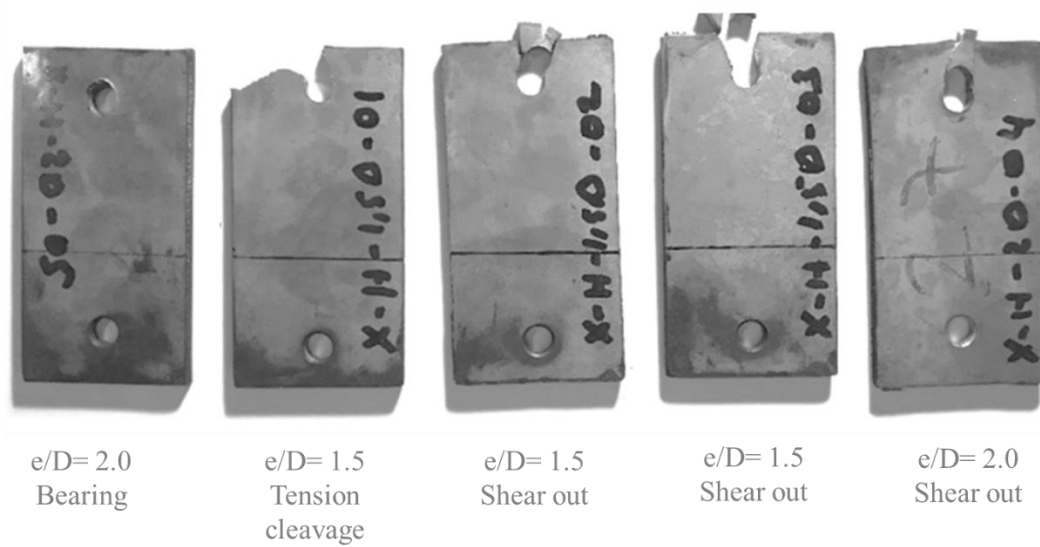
HIP post-treated ST build direction pin-bearing test specimens after fracture.
